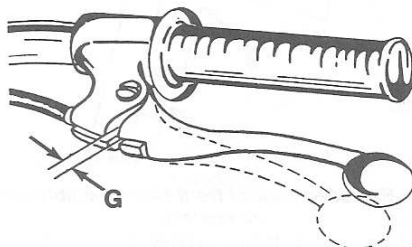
The rear brake should be adjusted if rear brake handlebar lever free play (G) exceeds 10 mm (0.4 in.).
